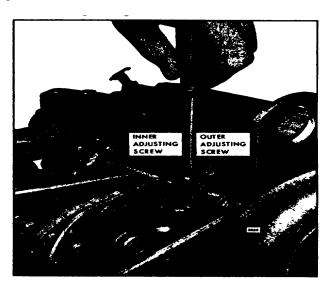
Adjusting Height of Rack Control Lever Adjusting Screws
